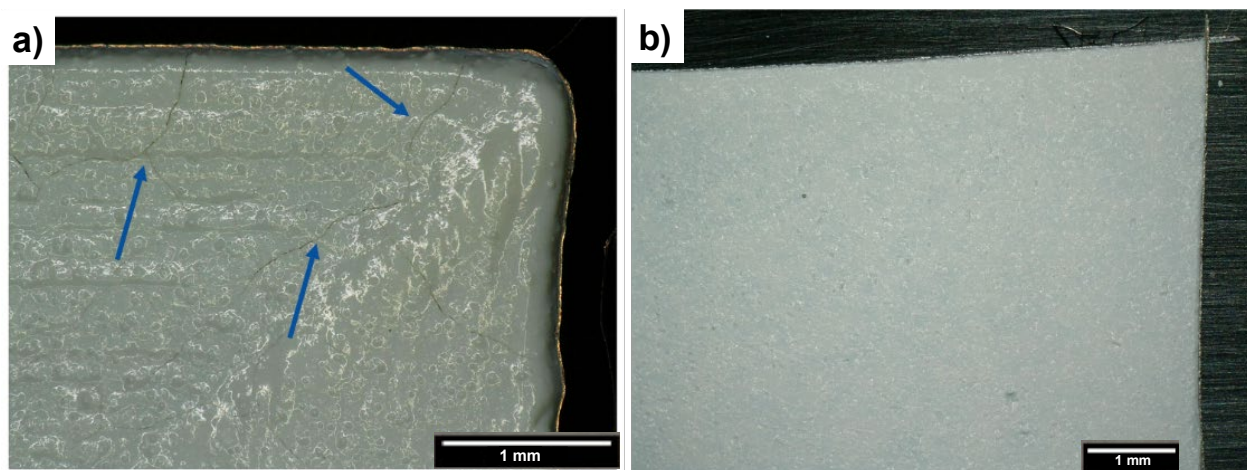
a) A 135- μm -thick BST film printed out by the Voltera V-One printer, revealing cracking caused by excessive film thickness and thermal expansion mismatch. b) A 55- μm -thick BST film that was screen printed with no visible cracking.
